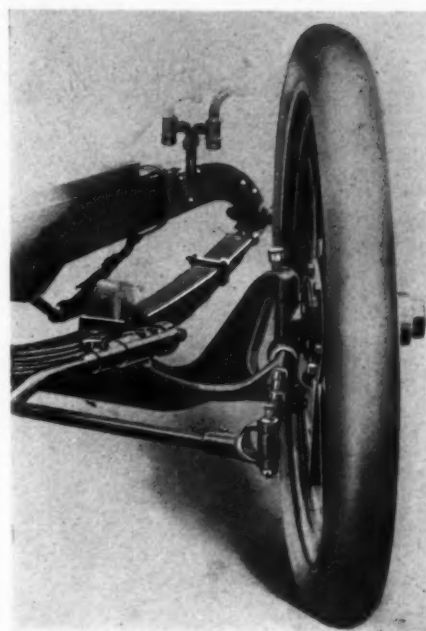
Suspension, Front Axle and Steering Knuckle Assembly.
